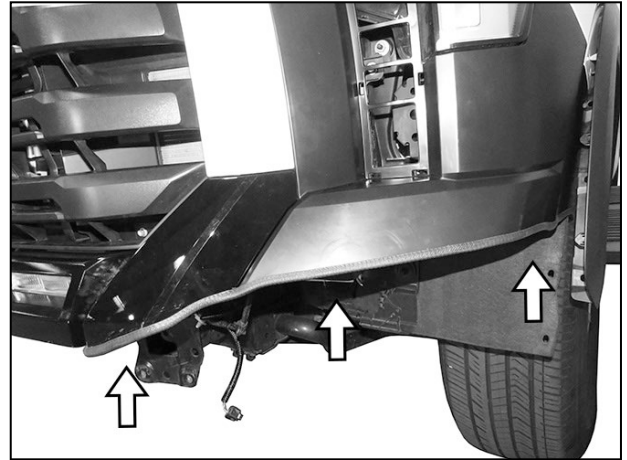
Use masking tape to make a diagonal guide line along bumper fill panel (see Fig 40) and cut bottom section off of inner bumper support along tape
